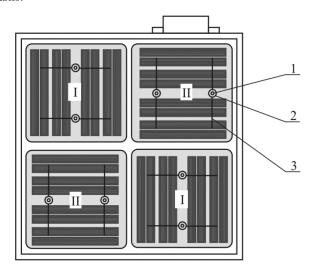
Load-bearing surface of the forcer mounted on the elevator cabin
